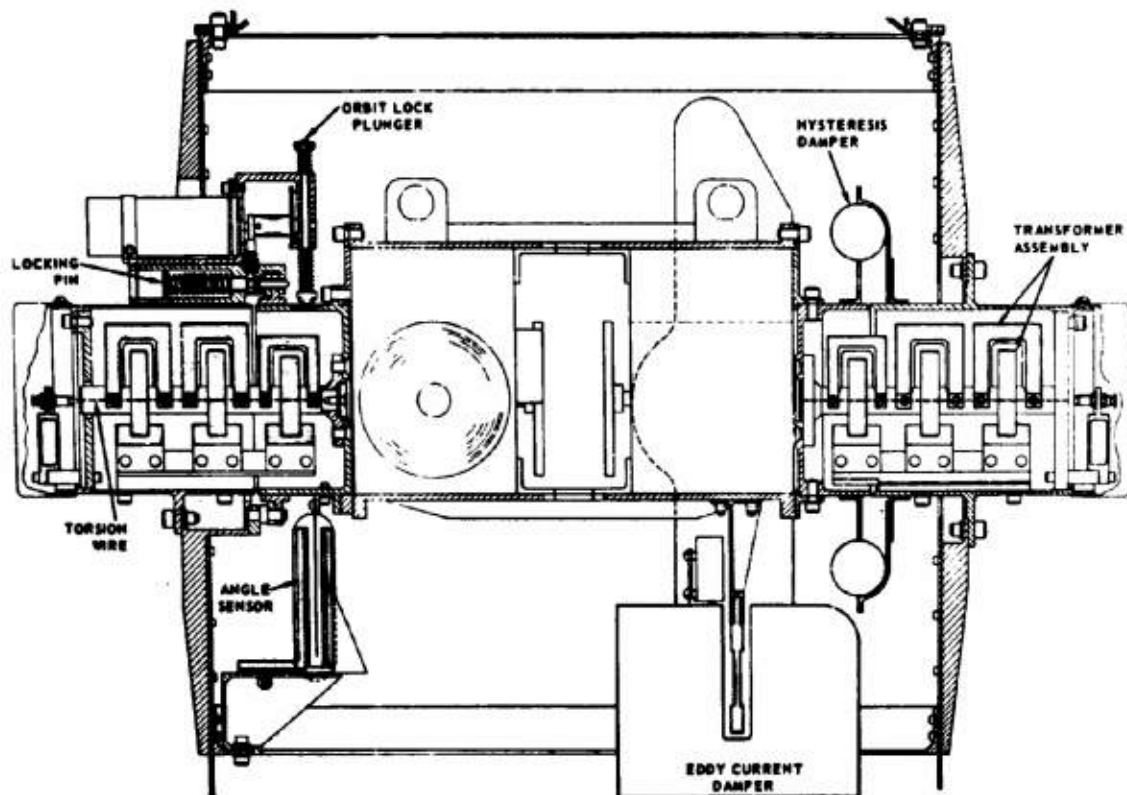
TORSION WIRE DAMPER ASSEMBLY CROSS SECTION
